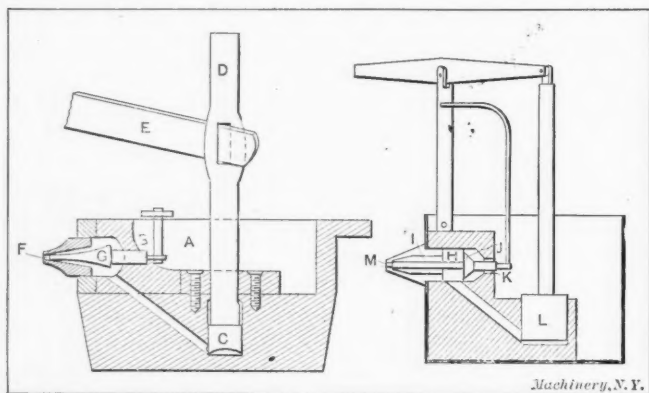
Type-casting Machine built in 1849. Fig. 2. Improvement in the Type-casting Machine, made in 1856
